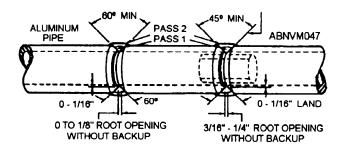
Joint design and weld pass sequence horizontal fixed-position multipass GMA welding.
